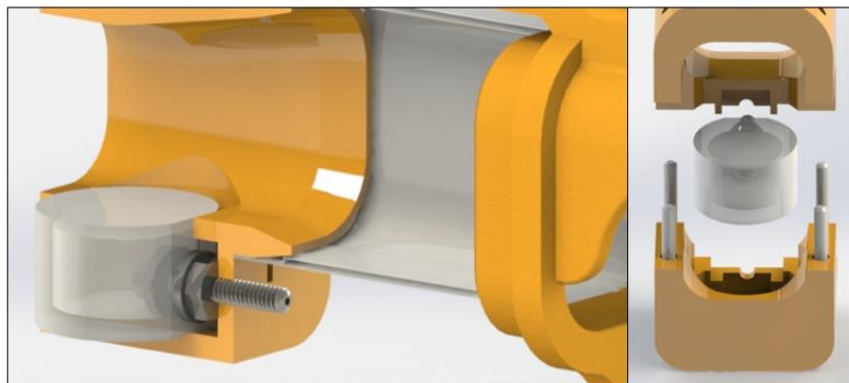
Fingertip actuator mount: Cutout view (left) Exploded view (right)
